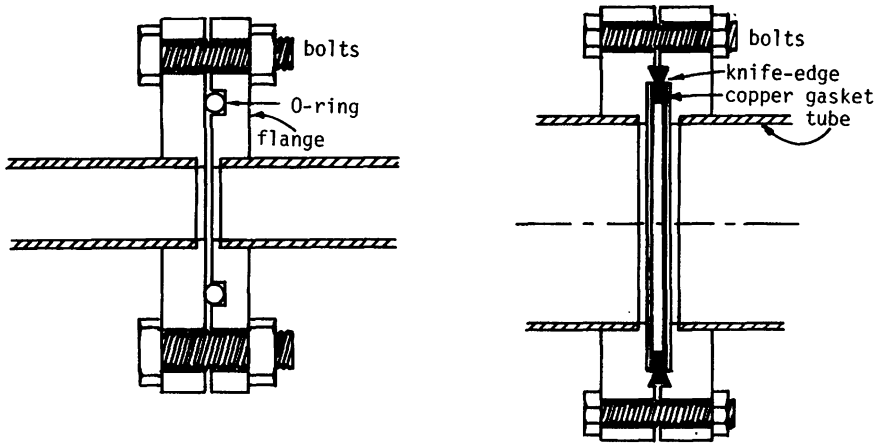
Flange sealing techniques. An O-ring seal (left), and a bake able metal seal (right)
